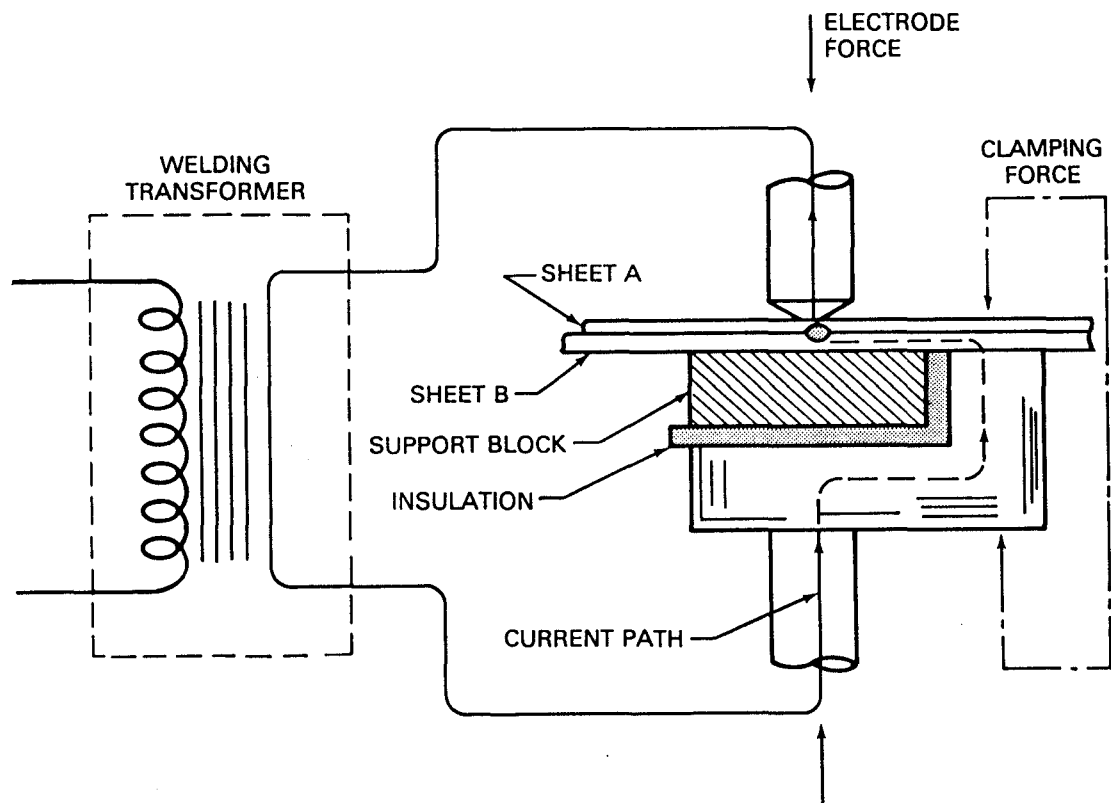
Application of Indirect Welding to Minimize Marking on One Side
